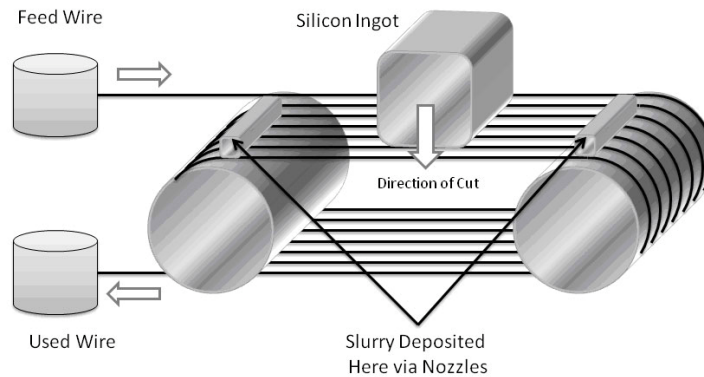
Wire sawing process, loose abrasive slurry (LAWS) [9].
